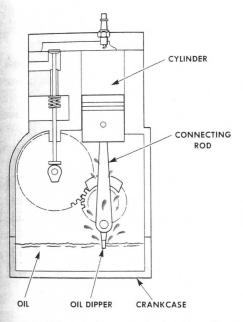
The oil dipper splashes the oil up on the engine parts.
